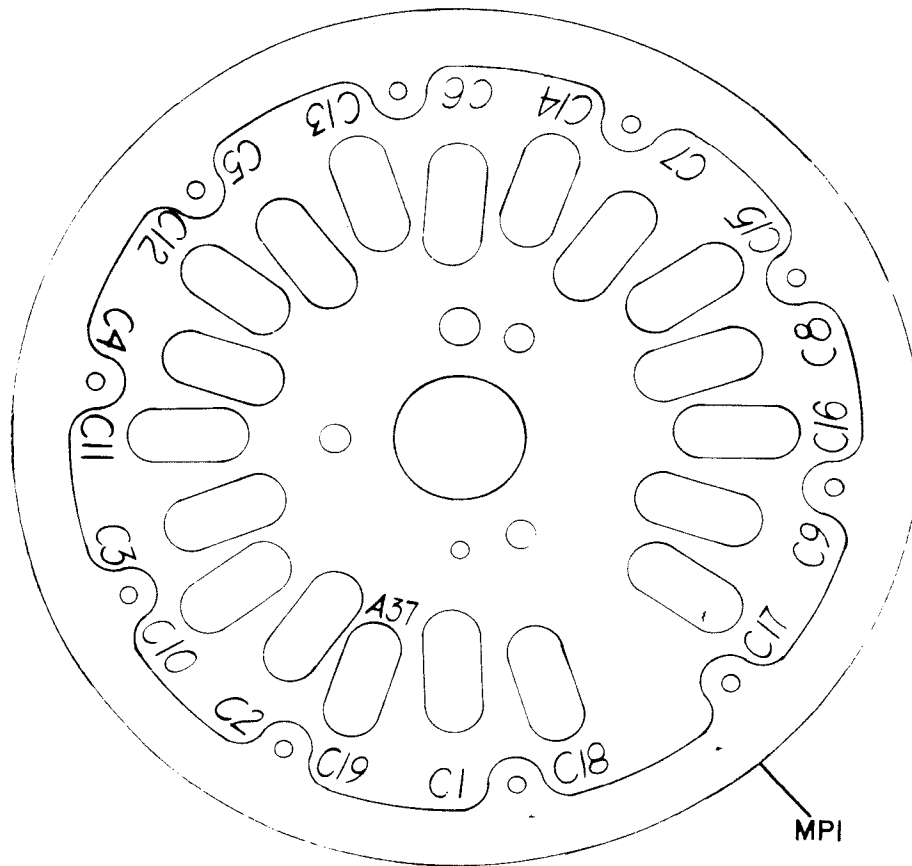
100 kHz Rotor Subassembly A2A4A37,
